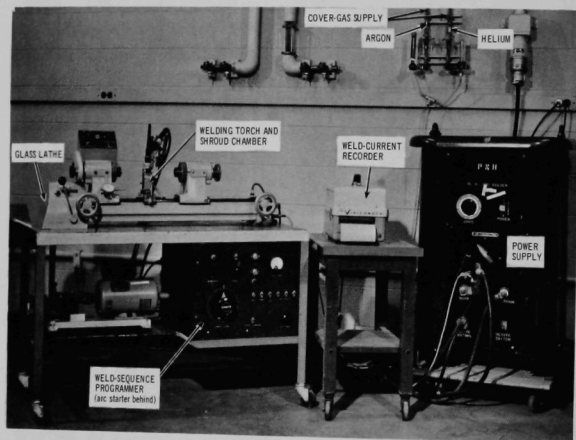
Welding Equipment That Made Initial End Closures on Fuel-element Assemblies and Capsules for Subassembly XX01.
